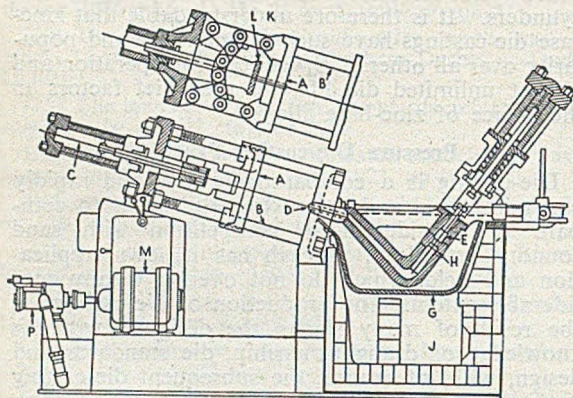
Diagram Illustrating a Hot-chamber Die-casting Machine
